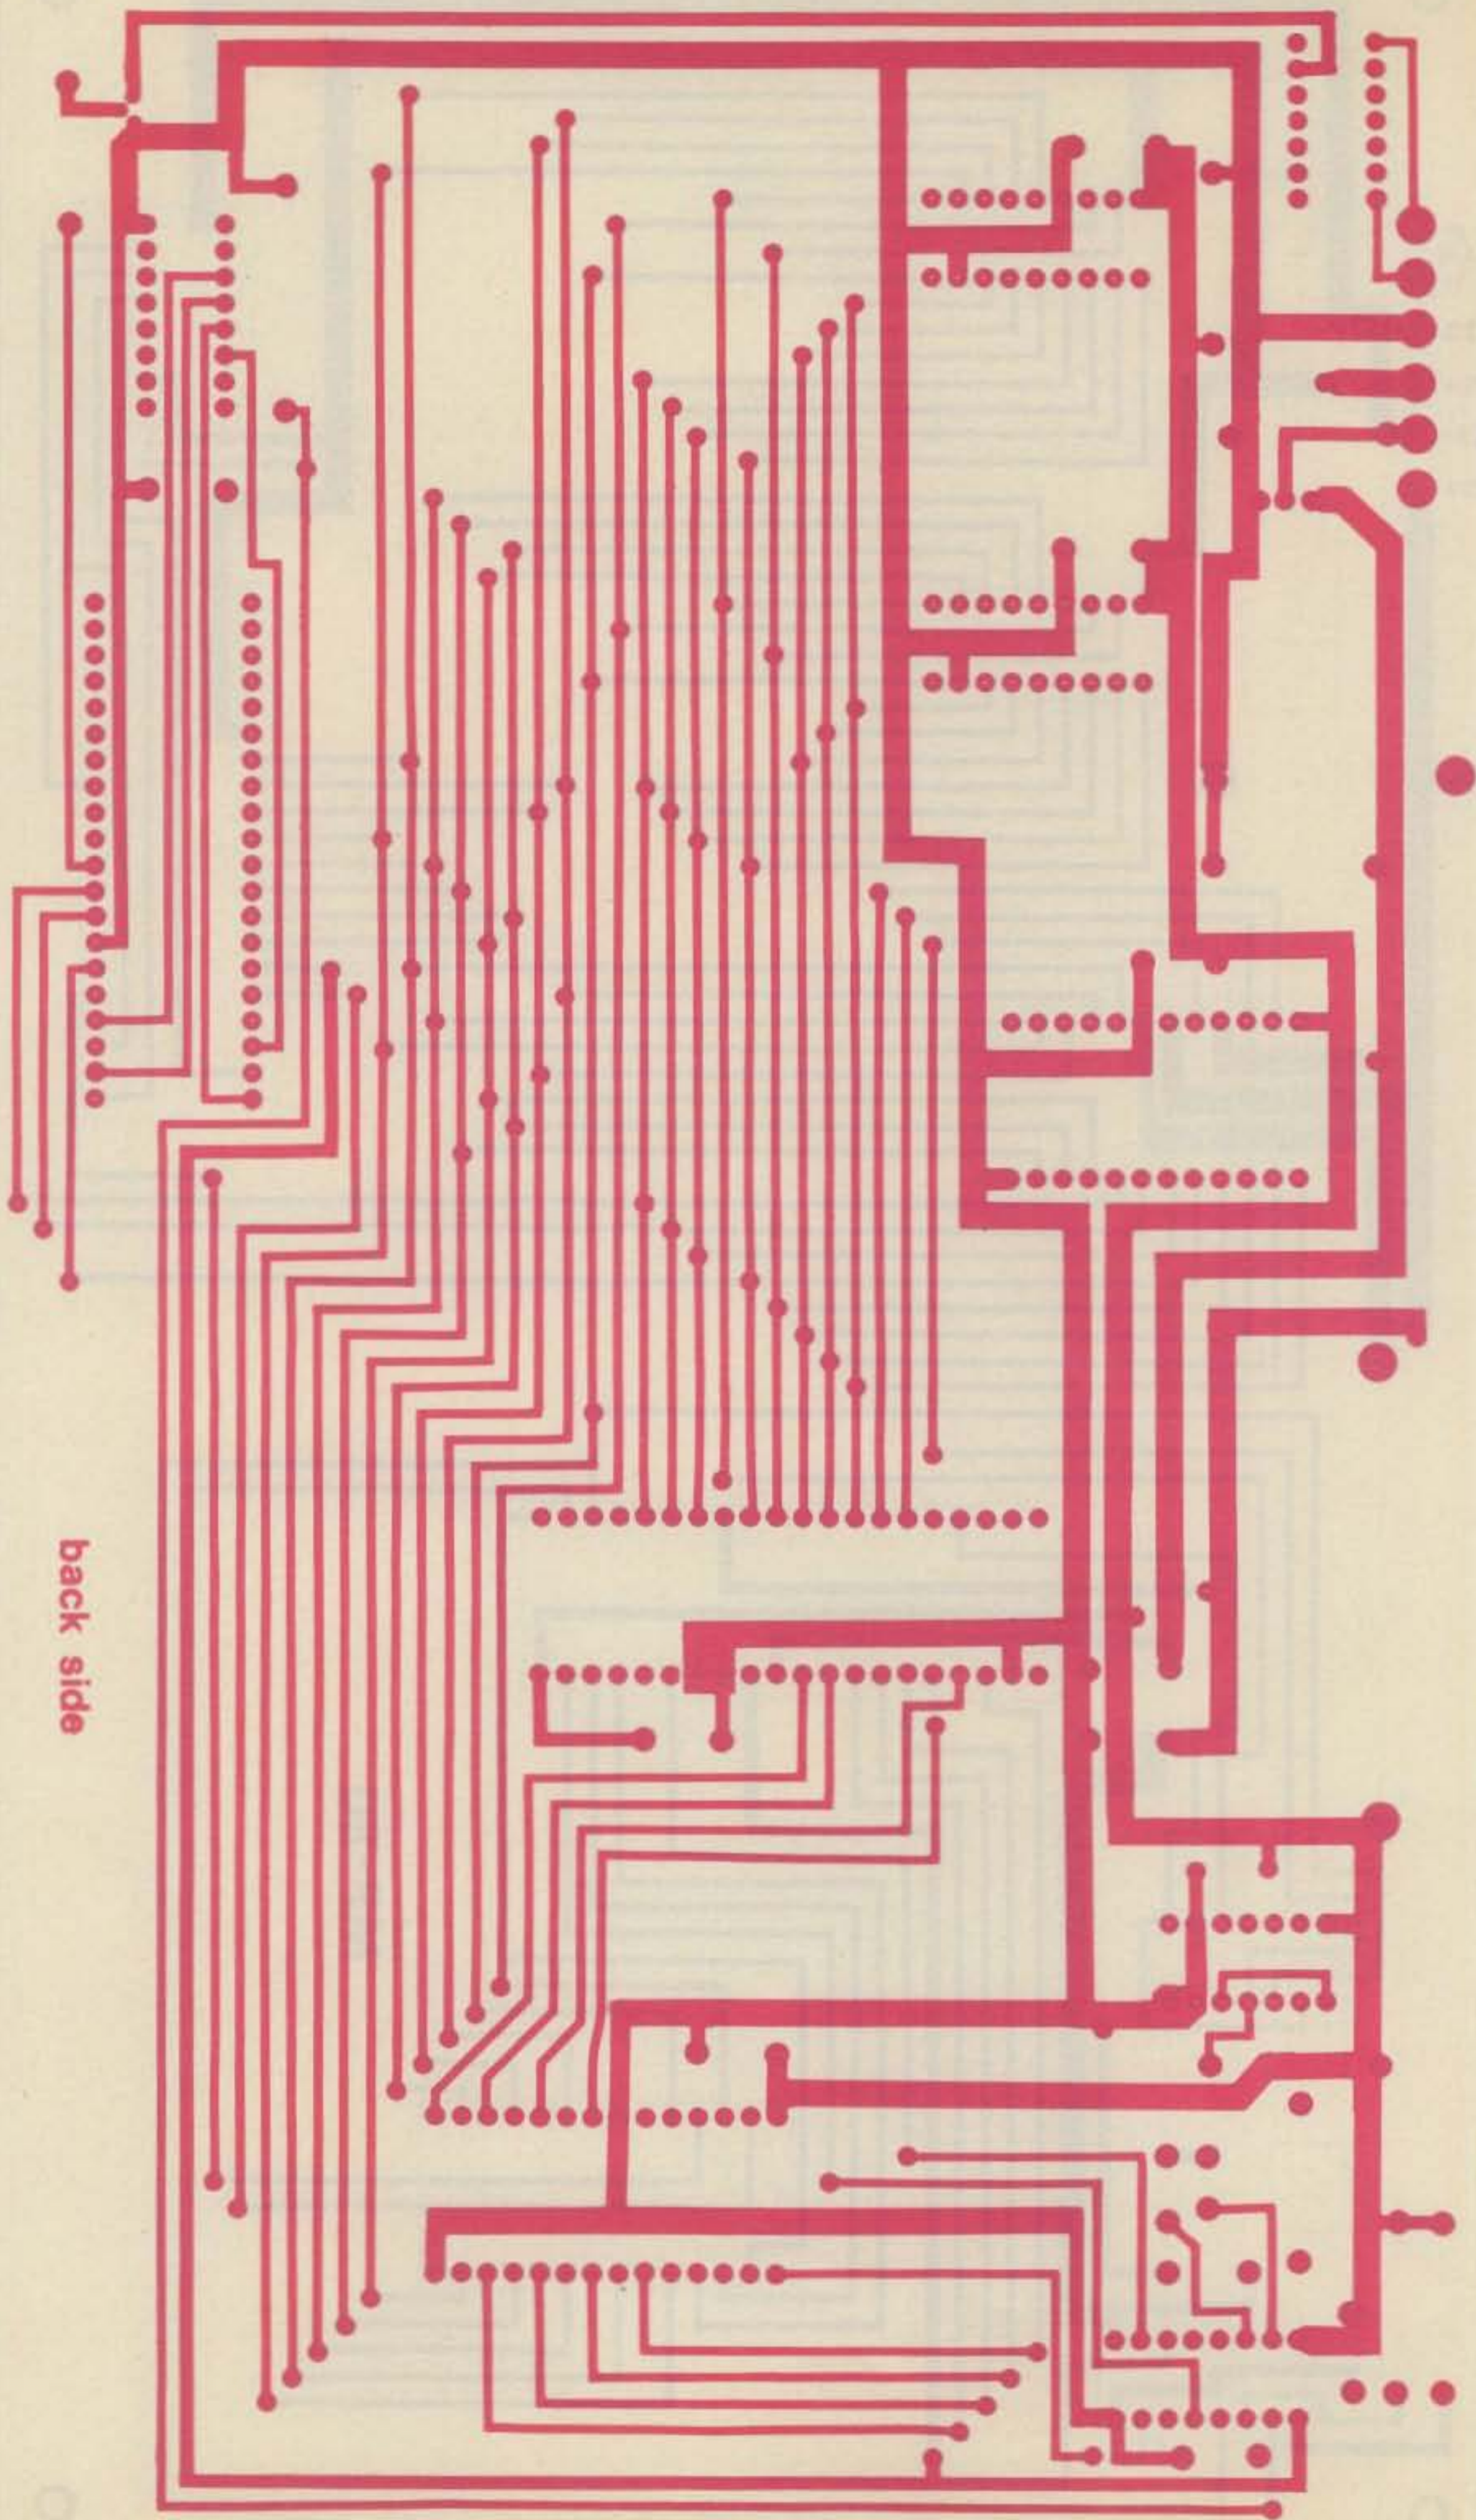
Foil pattern of the bottom circuit board. This pattern is full sized. This board is lined up with fig. 3 on the previous page.
